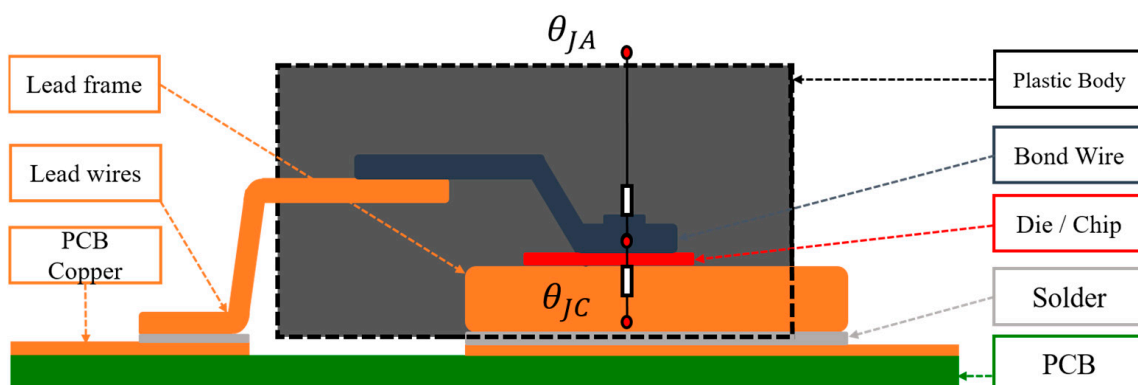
Cross-section of PCB-mounted D2PAK MOSFET package.
